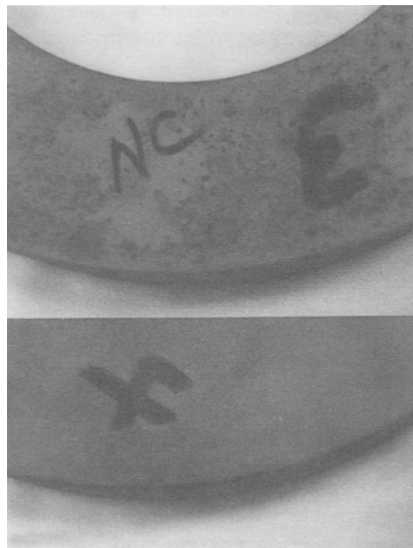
Slurry pump flanges arc sprayed with tungsten carbide
